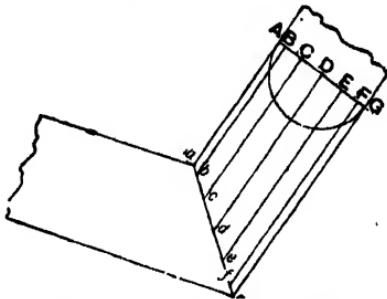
Plan of Half-round Eaves Spout Angle.
